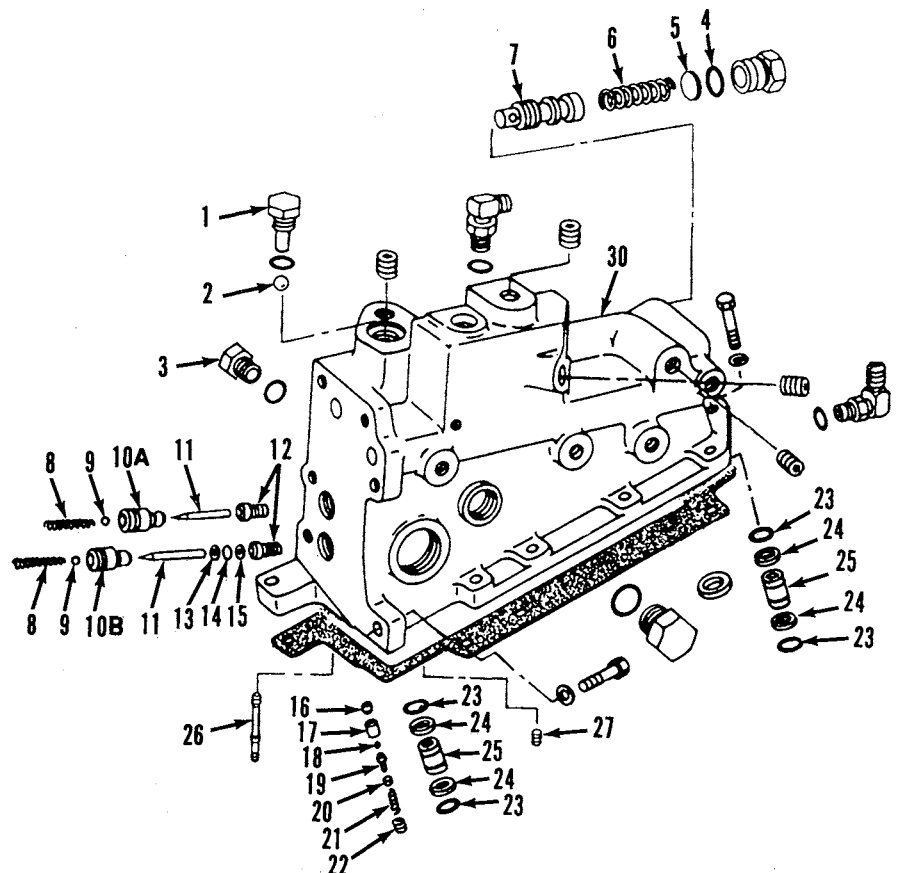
Exploded view of rockshaft control valve housing used on Models 4650 and 4850. Refer to Fig. 253 for legend.
